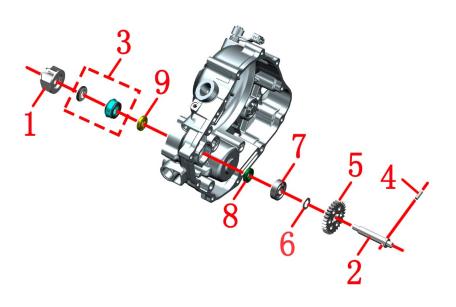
R	IGHT	Remove Right Crankcase Cover Assembly 4
